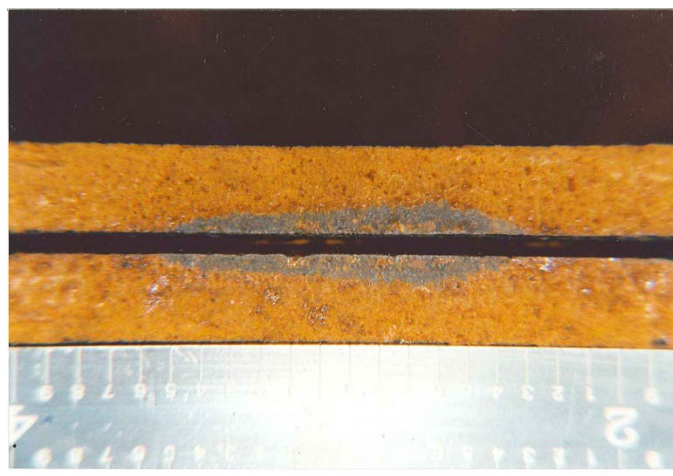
An Example of Brittle Fracture Initiation in Conjunction with a Cold Weld
